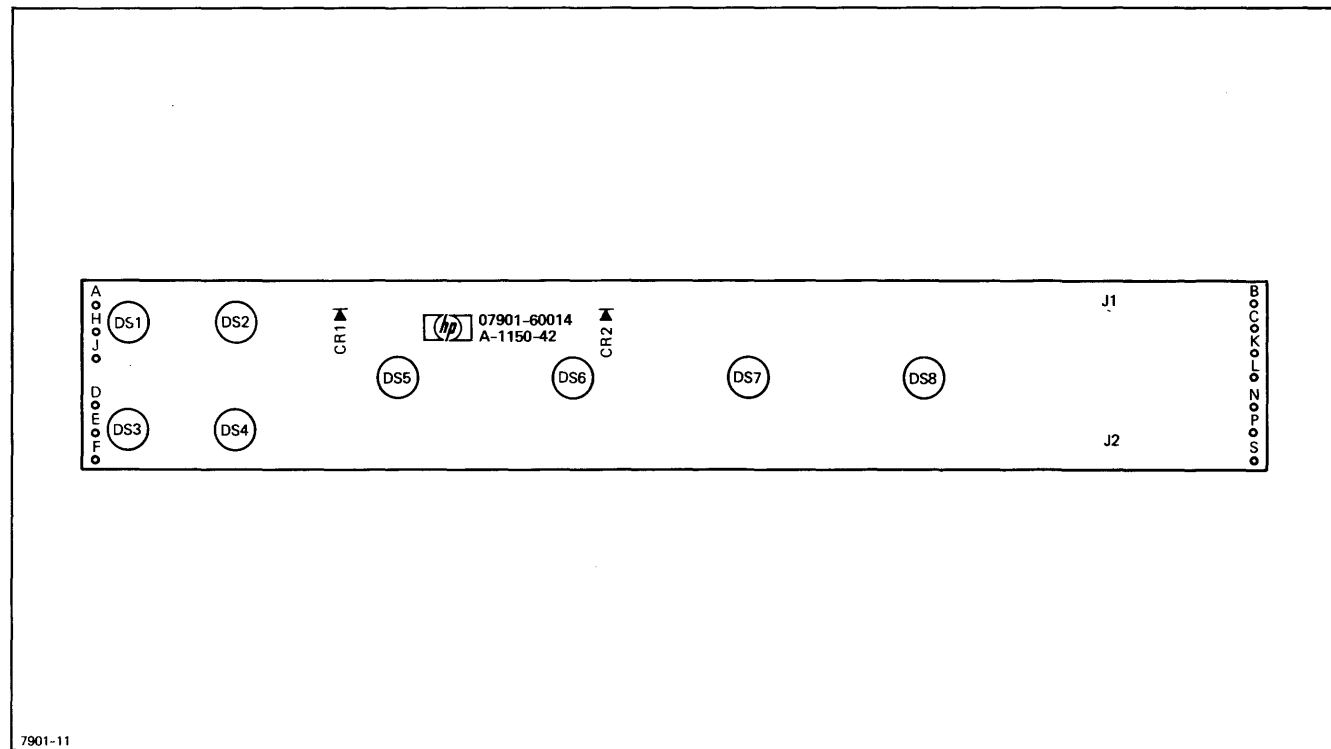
Indicator PC Assembly A1, Parts Location Diagram
